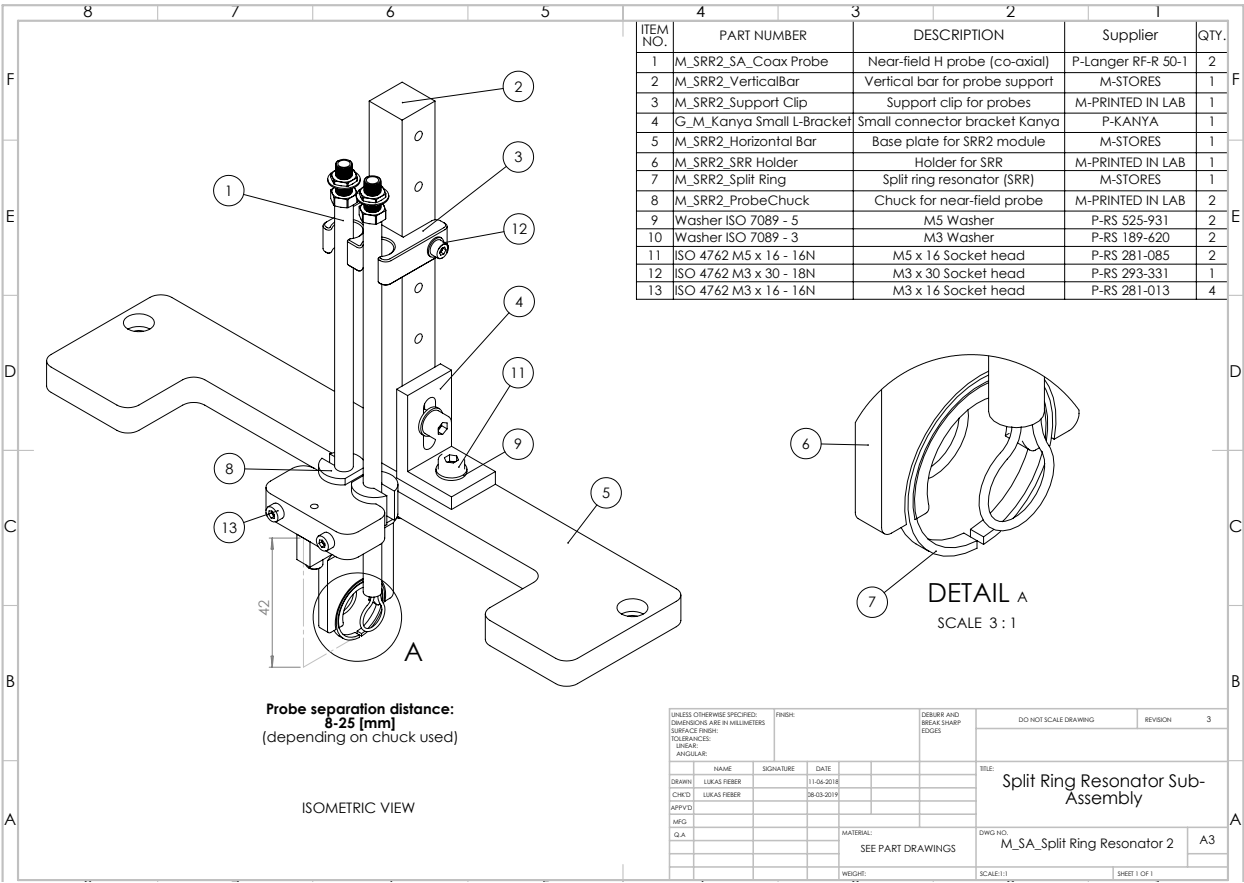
Engineering drawing of the SRR module sub-assembly.
